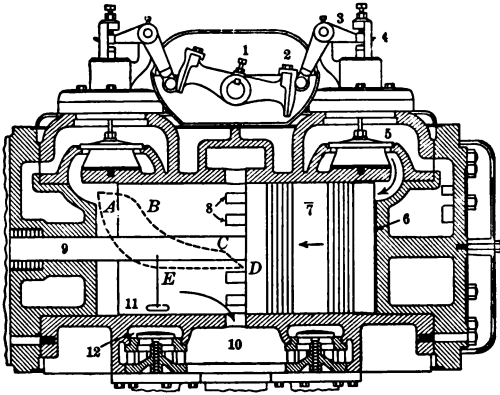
SKINNER "UNIVERSAL UNAFLOW" ENGINE
